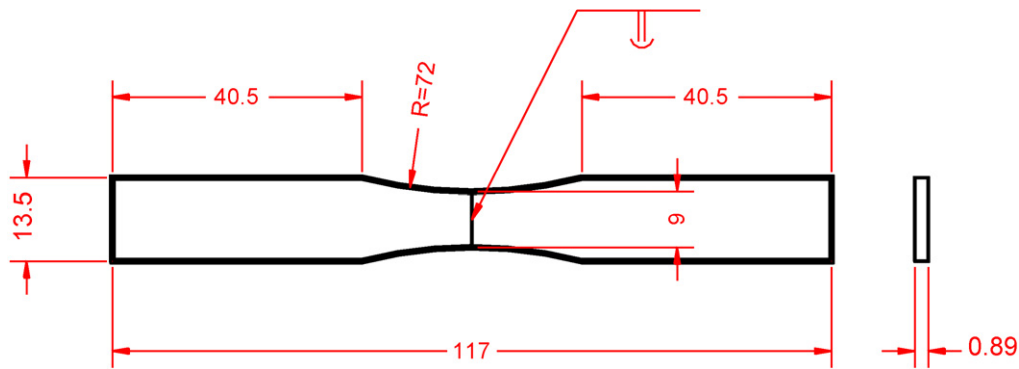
Flat axial fatigue specimen, with dimensions in [mm].
